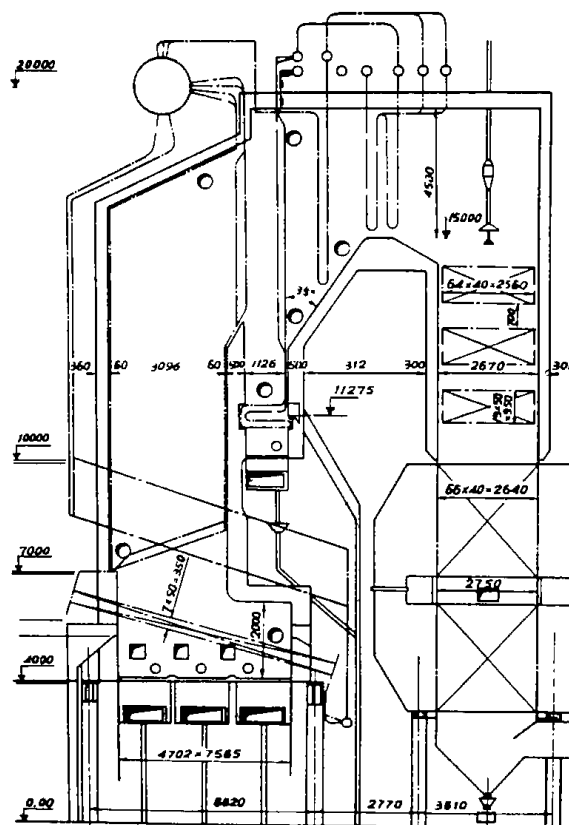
・6 130 t/h steam fluidized bed combustion boiler (China).
